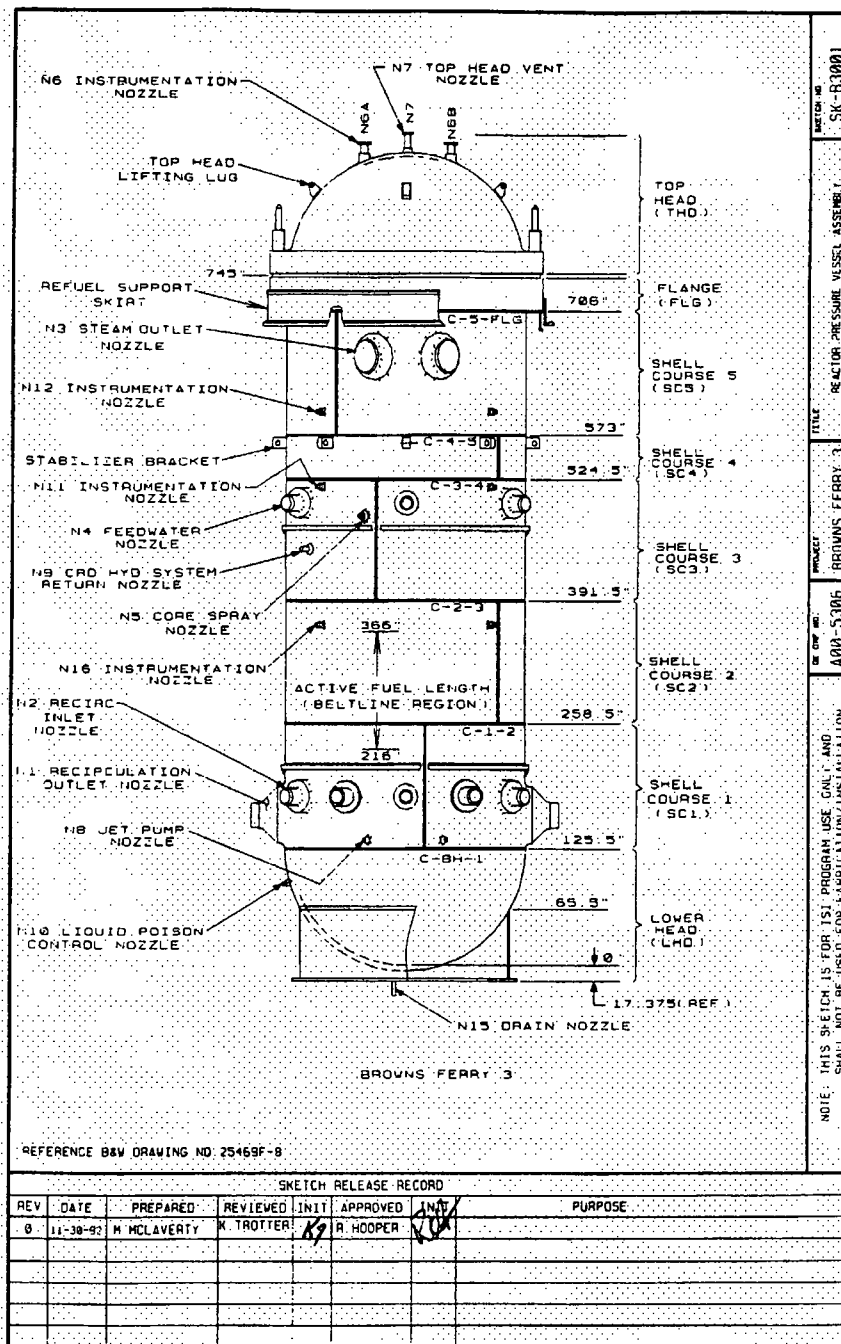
, Reactor Pressure Vessel Assembly
